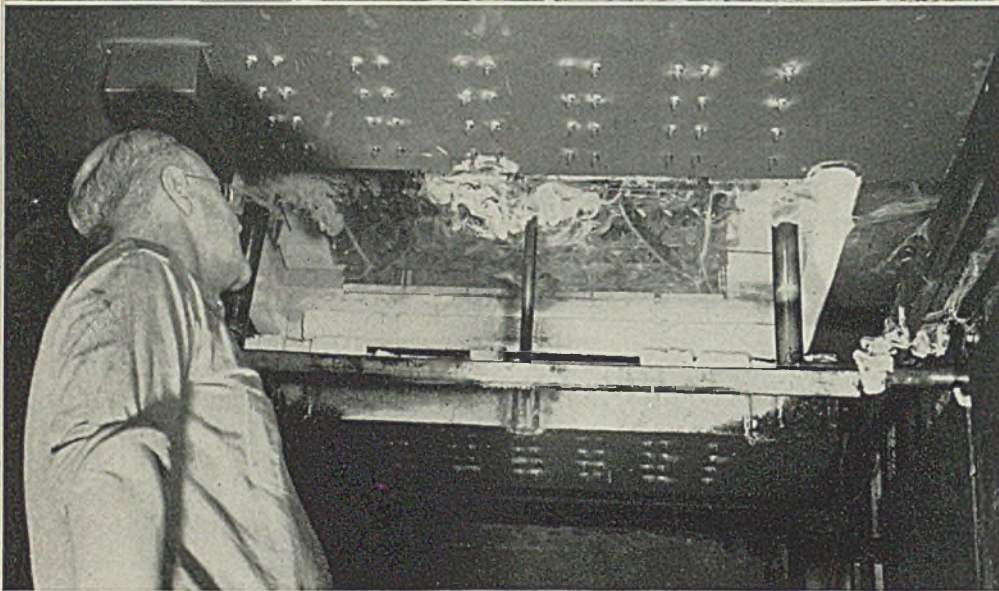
(Lower view)—William Grassam, heat treating foreman, looks up into heating chamber of the drop furnace, shown here with bottom sections partly opened. Doors cover loading chamber so little heat is lost while heating chamber bottom is opened
